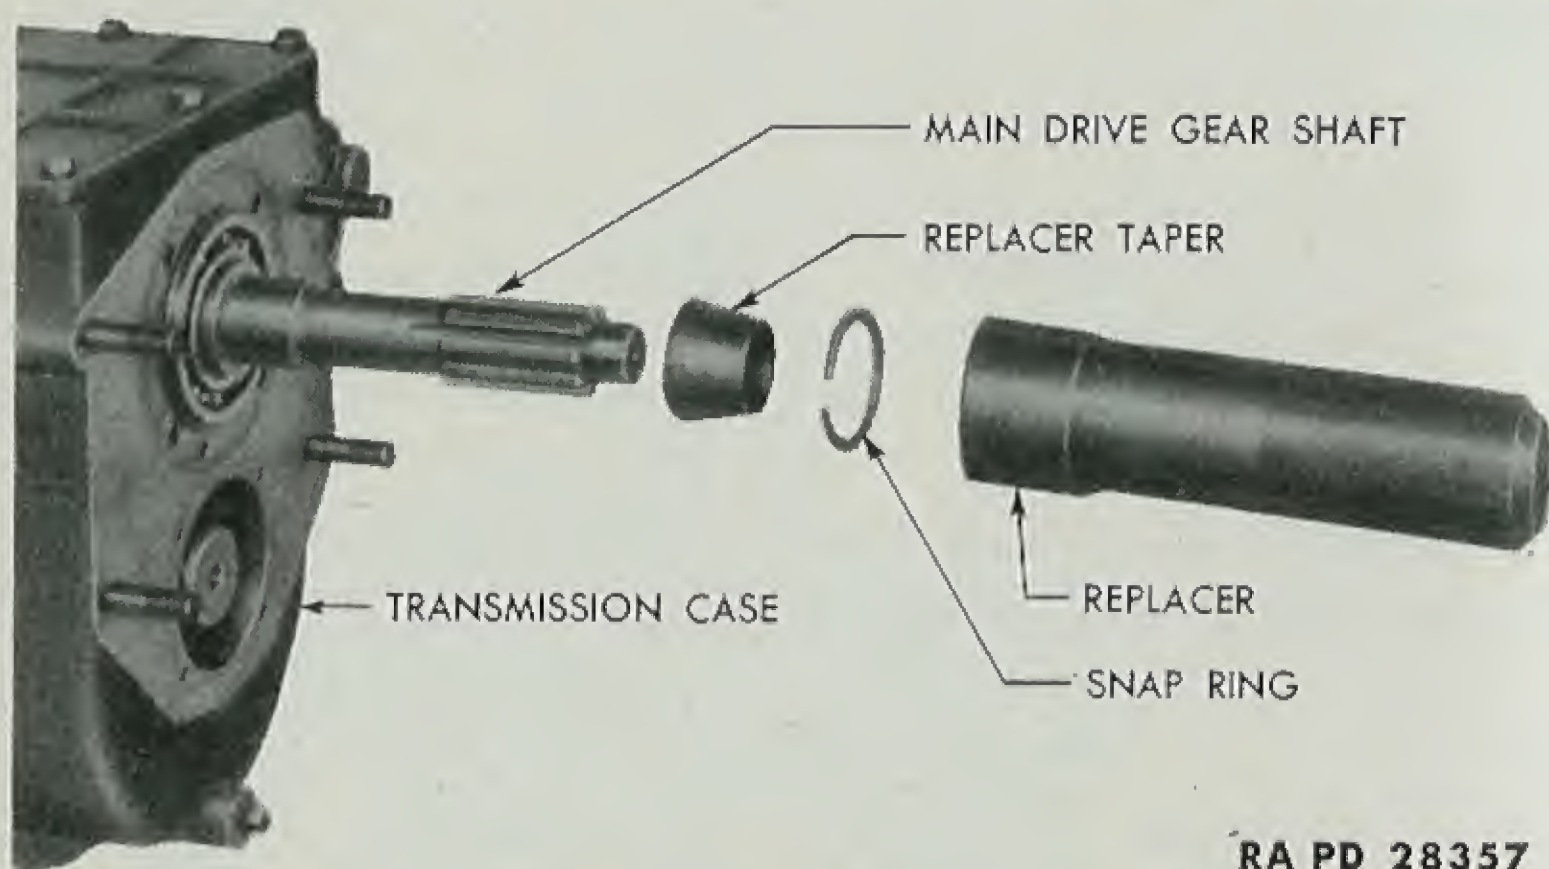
Driving Main Drive Gear Bearing into Case with Bearing Replacer 41-R-2391-72
